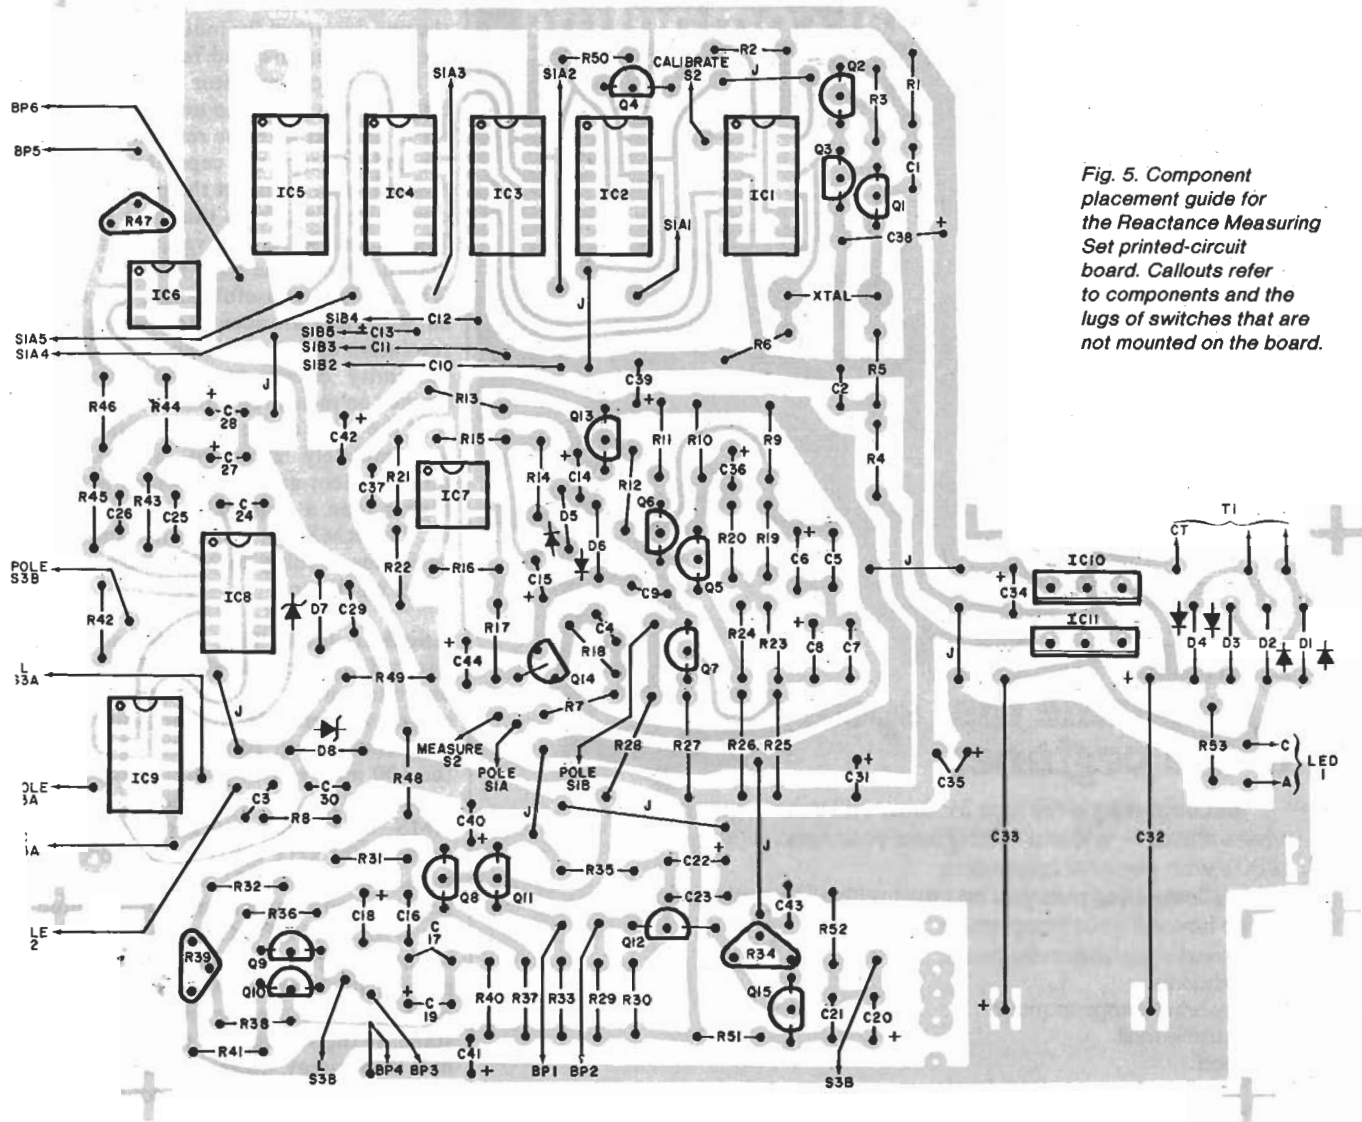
Component placement guide for the Reactance Measuring Set printed-circuit board. Callouts refer to components and the lugs of switches that are not mounted on the board.
